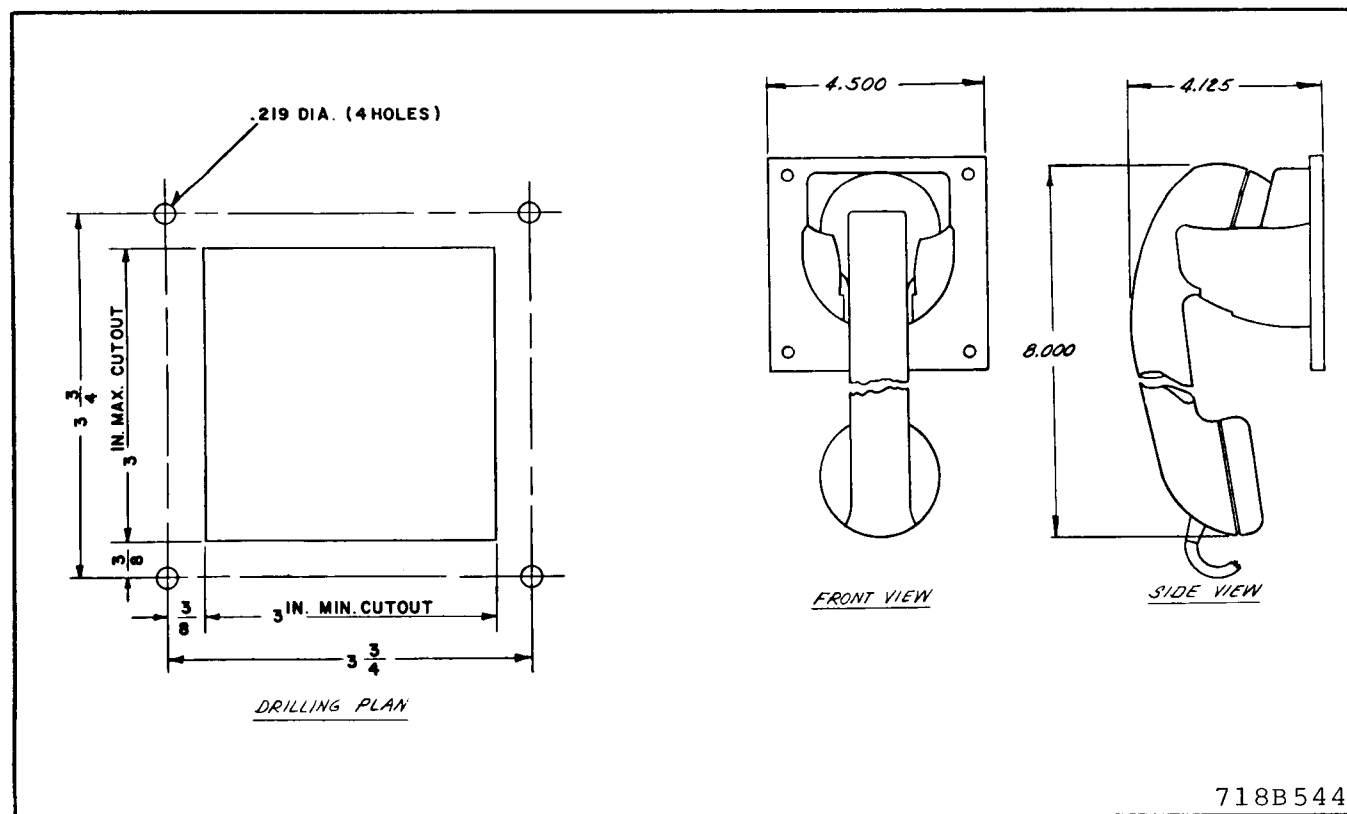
Mounting Dimensions for Panel Mounted Hookswitch- Handset Assembly
